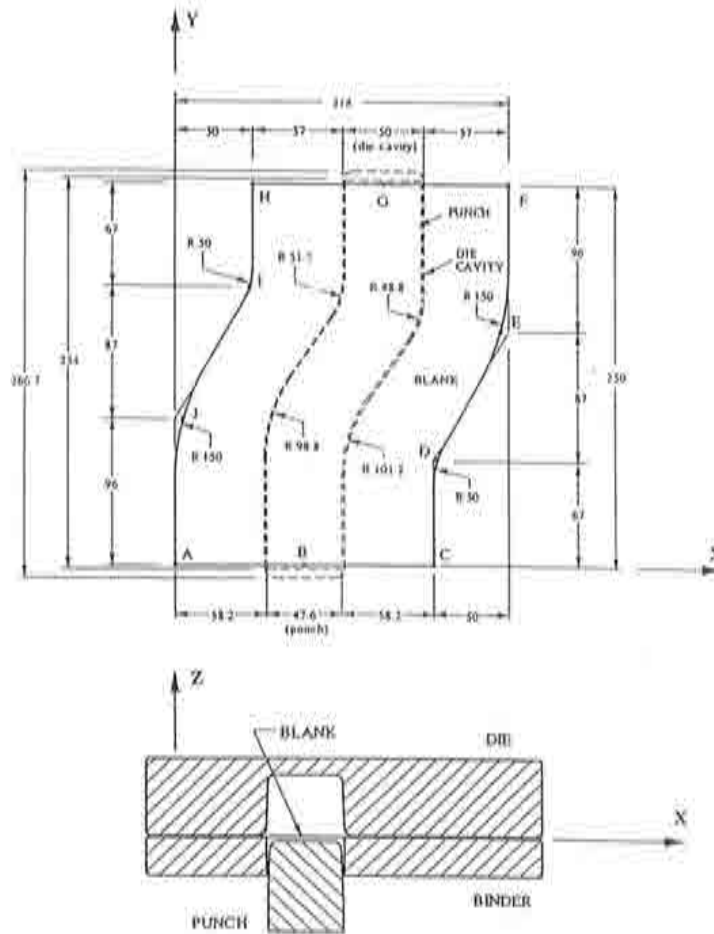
Complete geometry of the S-rail Deep Drawing and Springback.
